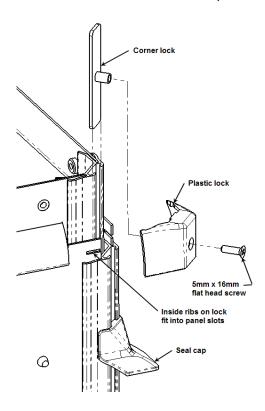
Installing the corner lock on vertical exhaust duct
